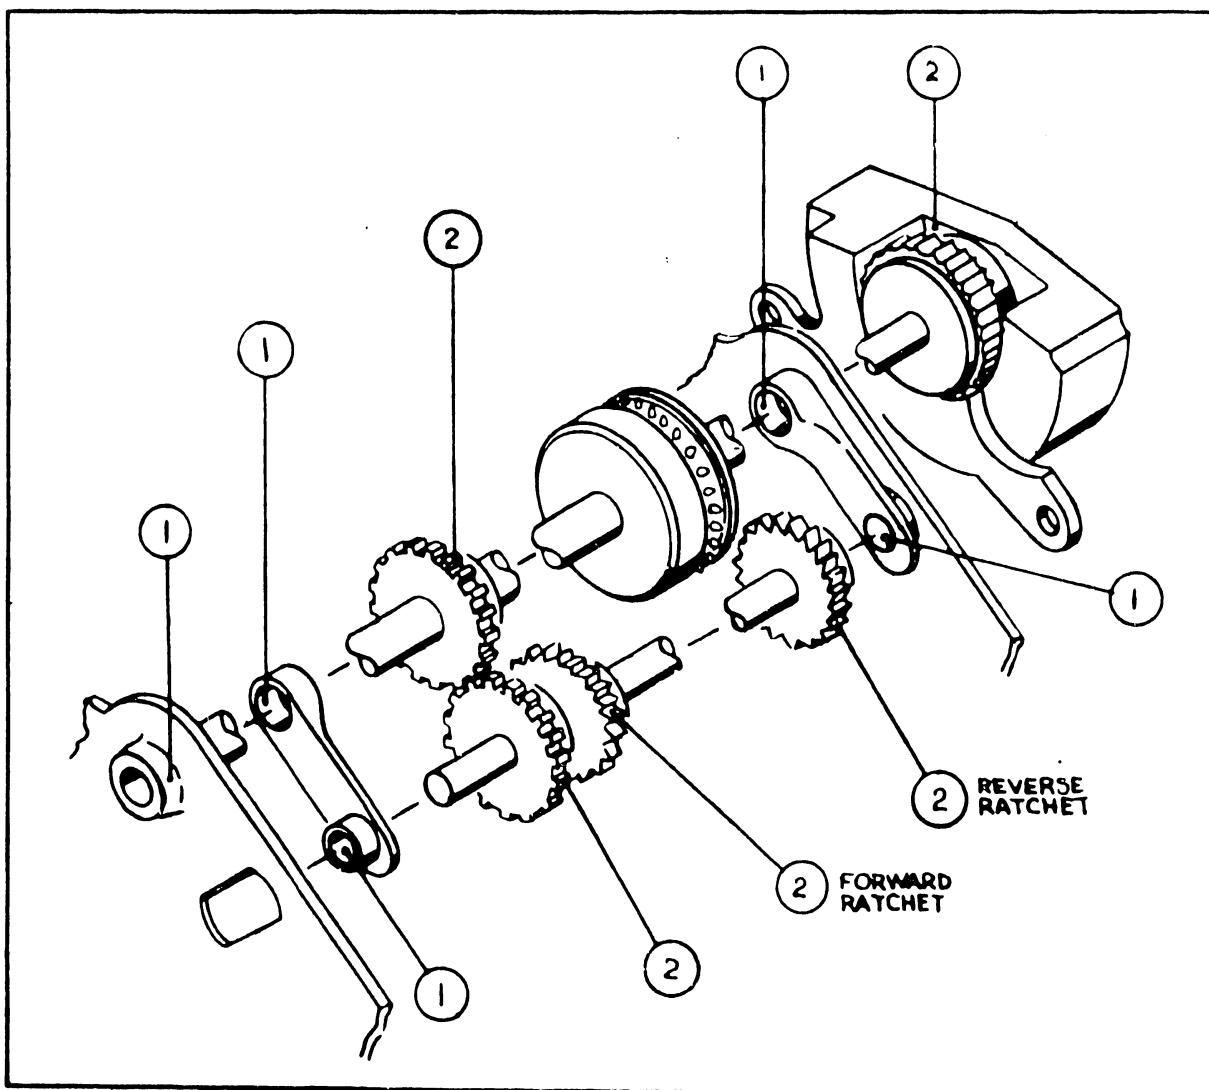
Lubrication Points: Ratchets, Gears & Pawl
